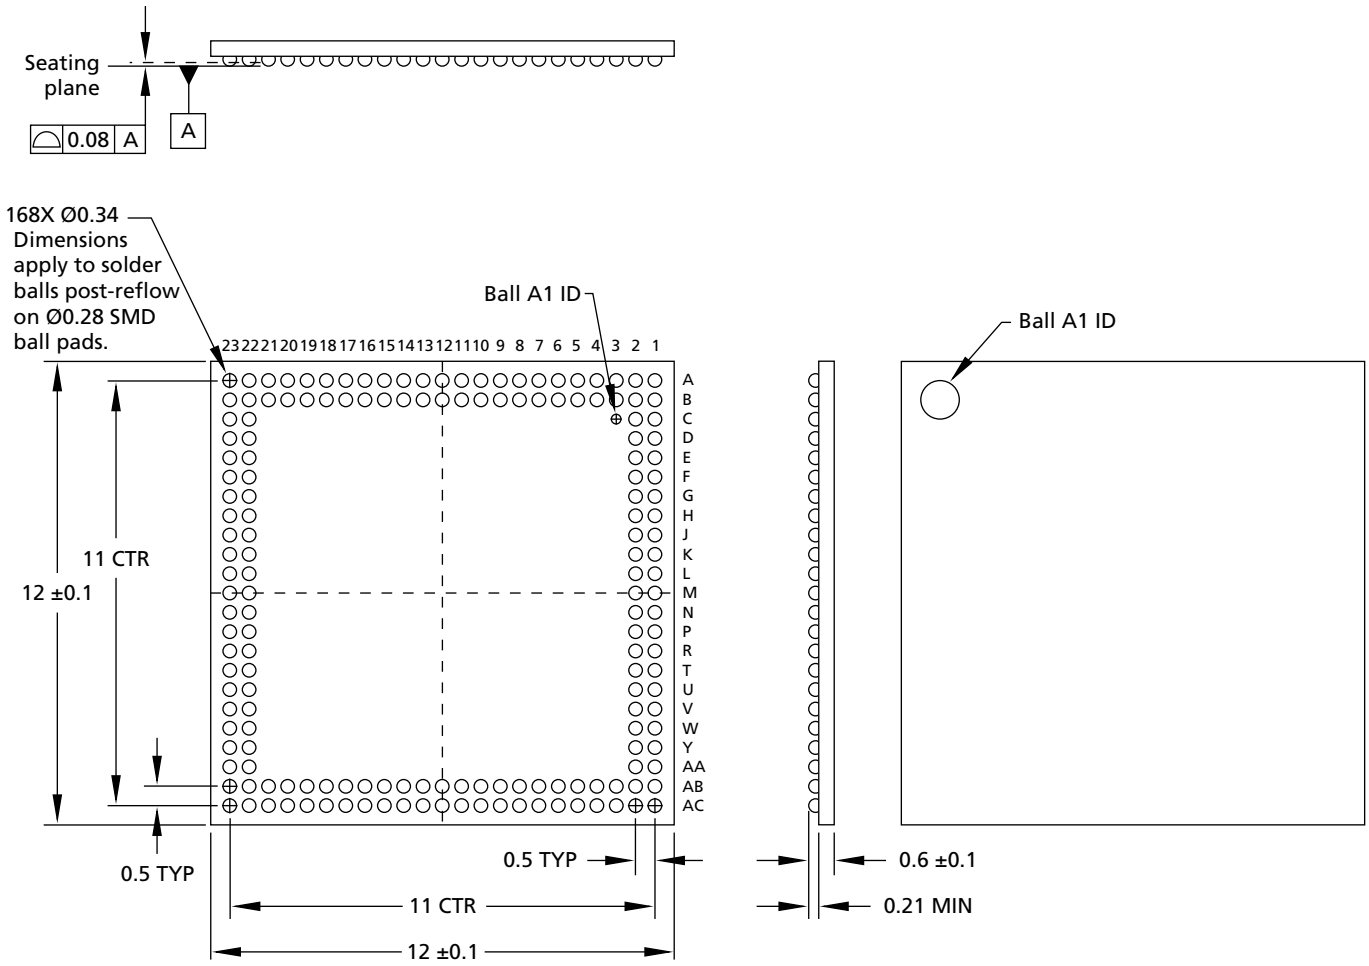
168-Ball FBGA (12mm x 12mm), Package Code: KQ
